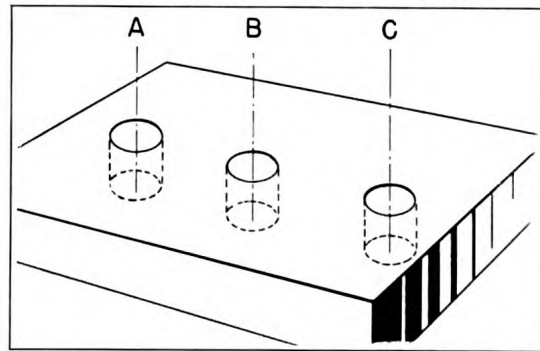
In grinding three holes to size, A and B are roughed to within .001" — .002", and C within about .005". Using a freshly charged mandrel, C is finished to size, thereby breaking down the high points on the tool. A and B may now be safely ground to size.
